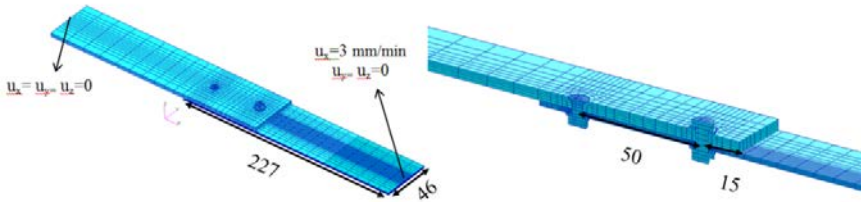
Joint geometry and boundary conditions, all dimensions in mm
